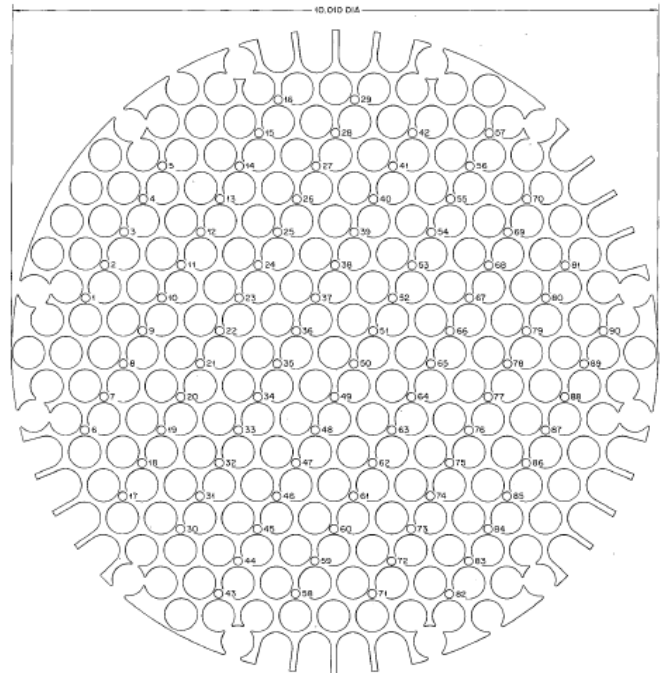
Drawing of Grid Plate with Sample Rod Locations.
